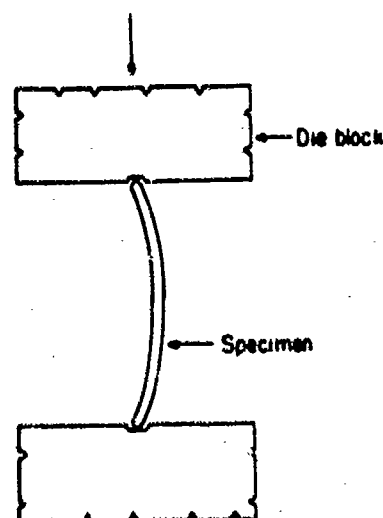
Bend test set-up for slender column specimen using universal testing machine and two die blocks.
